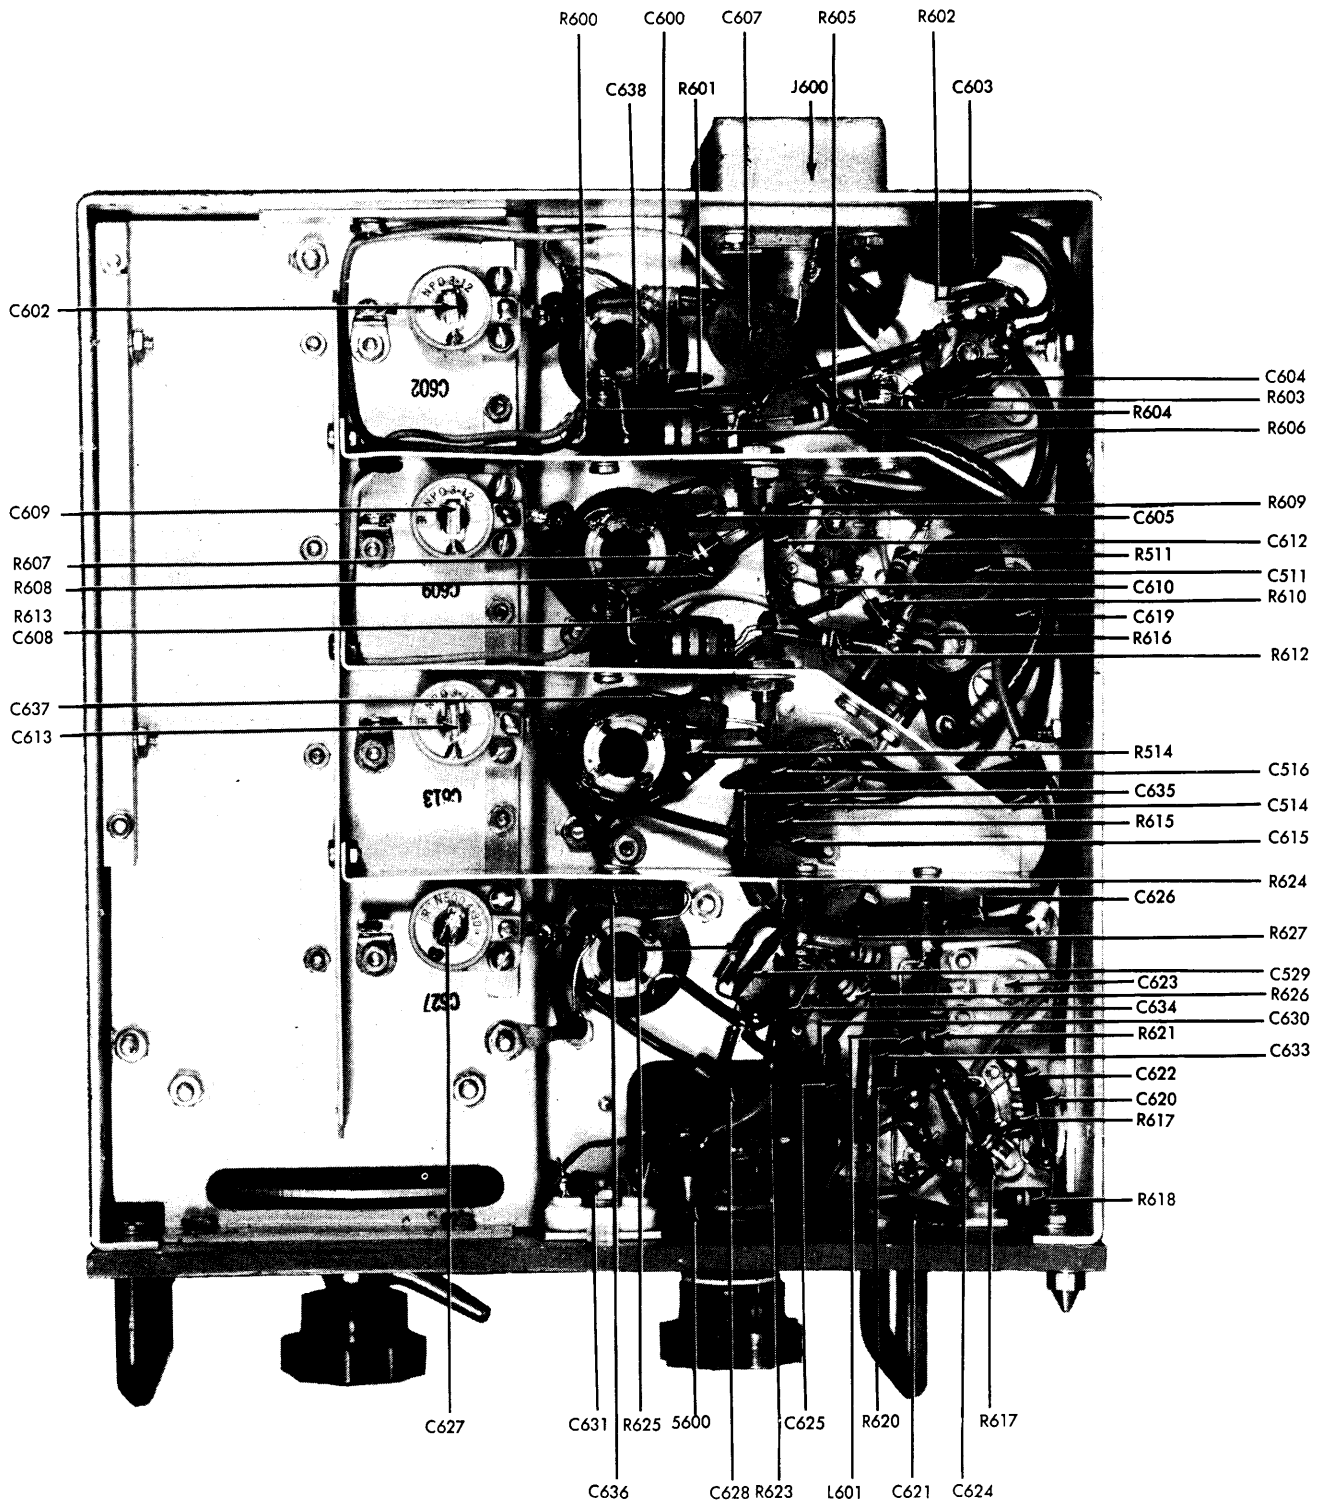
Bottom View (plate removed), TN-5011/FRR-502
